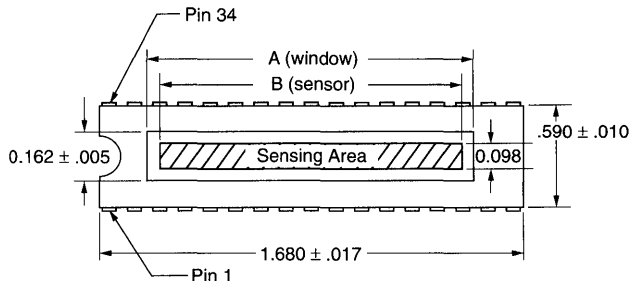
Package Dimensions (all dimensions are typical and in inches unless otherwise specified)
